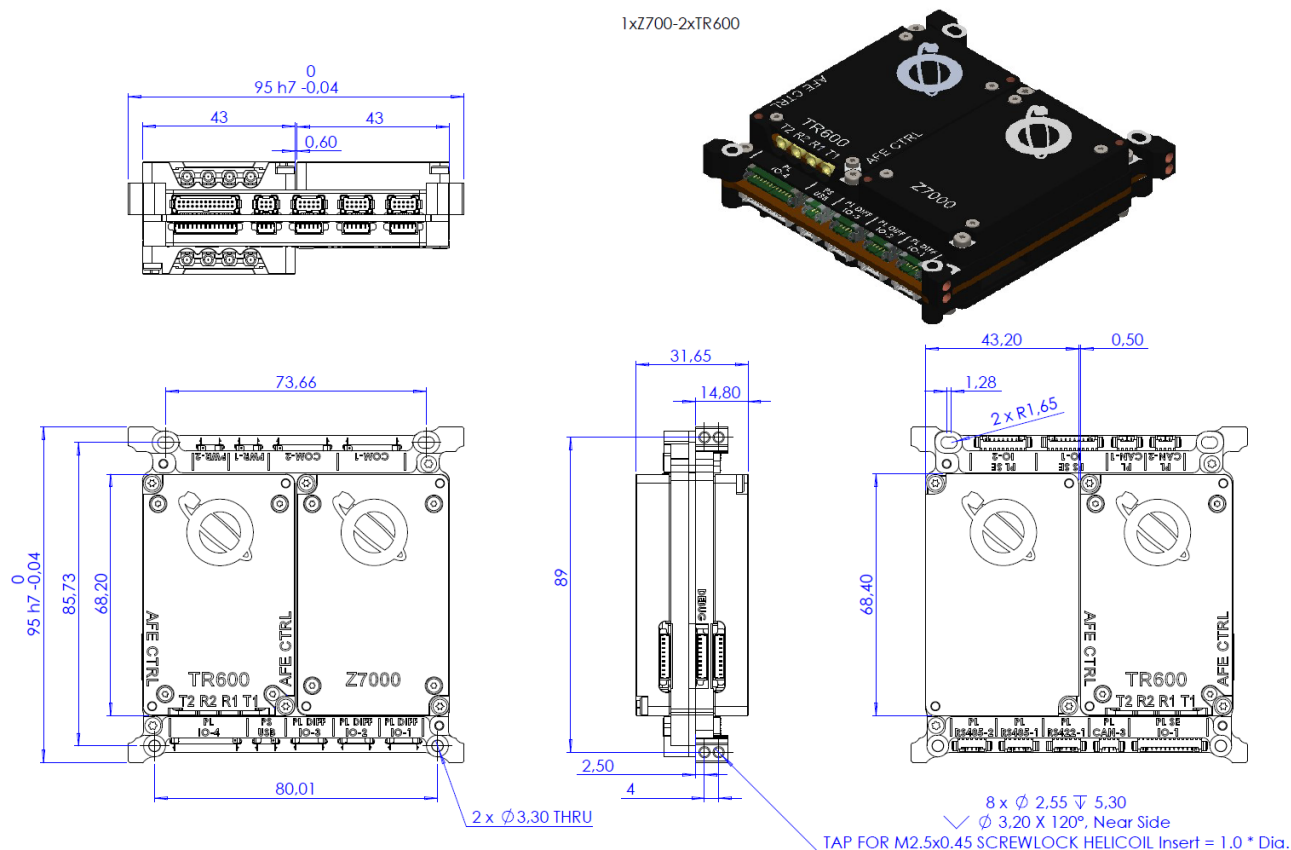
NanoCom SDR MK3 with 2xTR600 mechanical drawing (all dimensions are in mm)
